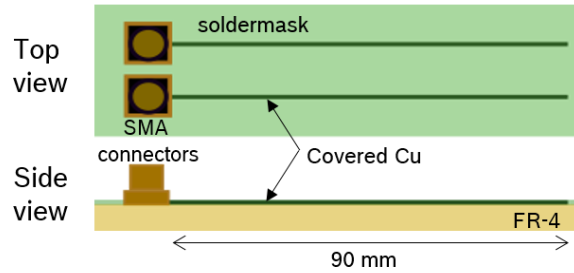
Schematic representation of top view and side view of a TDR pattern comprised of two parallel Cu tracks of 90 mm length. Covered with solder mask and soldered SMA connectors.
